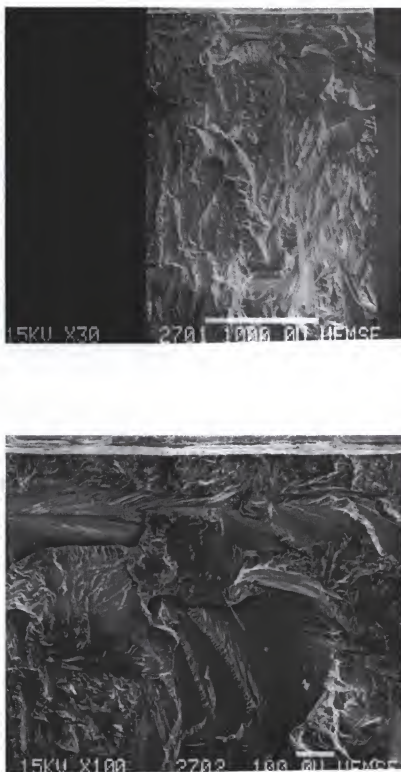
(a) Fracture surface of a specimen tested at 200°C at 2×10^{-4} mm/sec, and (b) a high magnification view of the fracture surface shown in (a).
